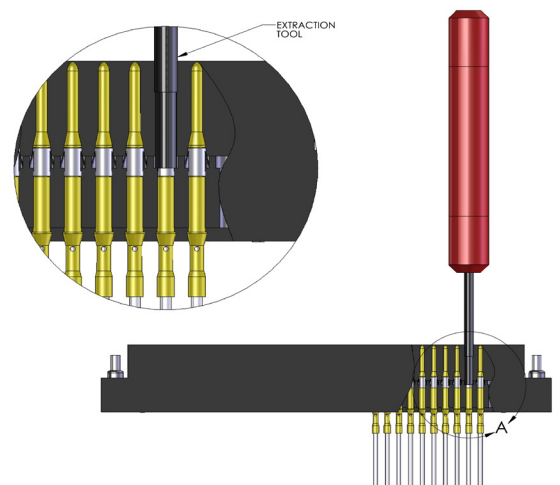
Figure B. Ensure that the extraction tool is kept perpendicular to the module face to avoid damage to the contact or tool.
